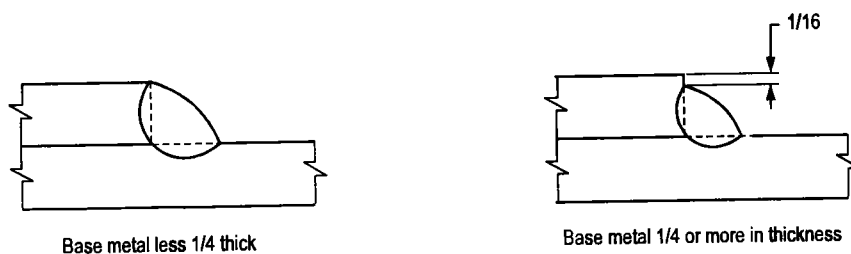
Maximum size of fillet weld along edges
